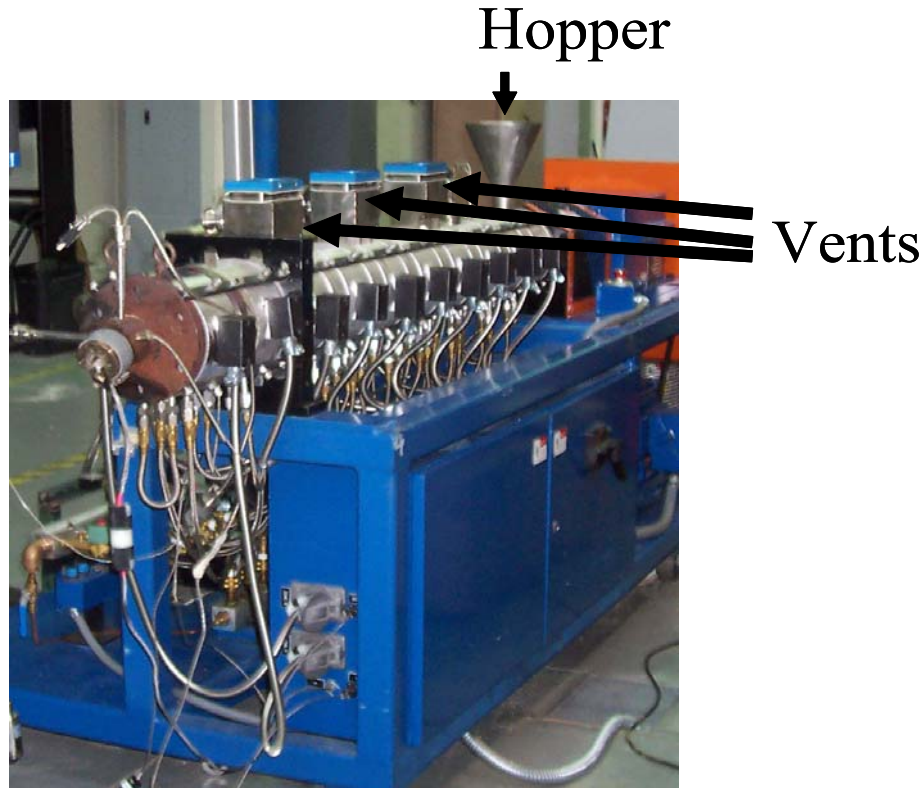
NFM Welding Engineers 30mm twin screw extruder
